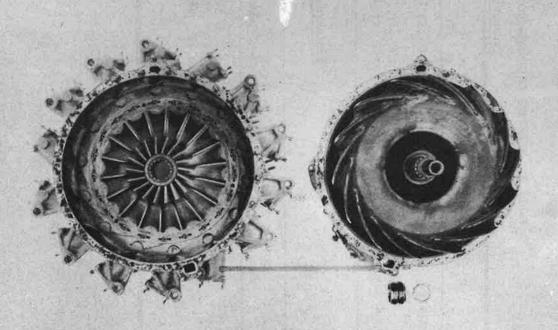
Figure II. Blower Case, Impeller, and Diffuser (CES-2963). 29814 The impeller shaft and crankshaft exterior are shown in the diffuser case. The oil gland for the crankshaft exterior is shown below the diffuser case.
